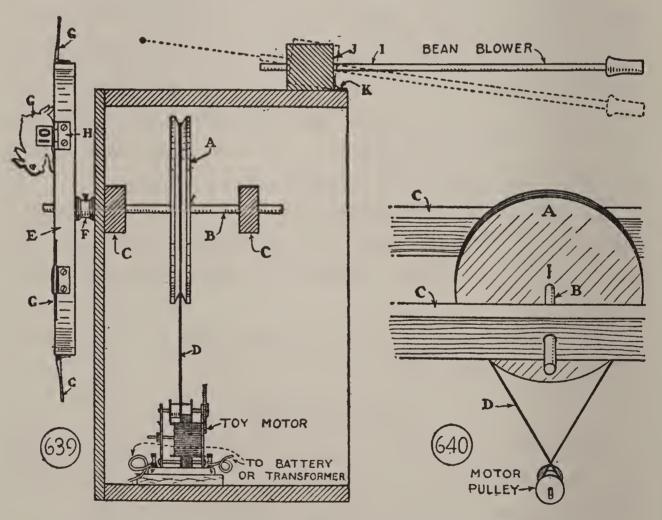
Cross-Section of Toy Electric Shooting-Gallery. Fig. 640.—Detail of Wooden Pulley.
